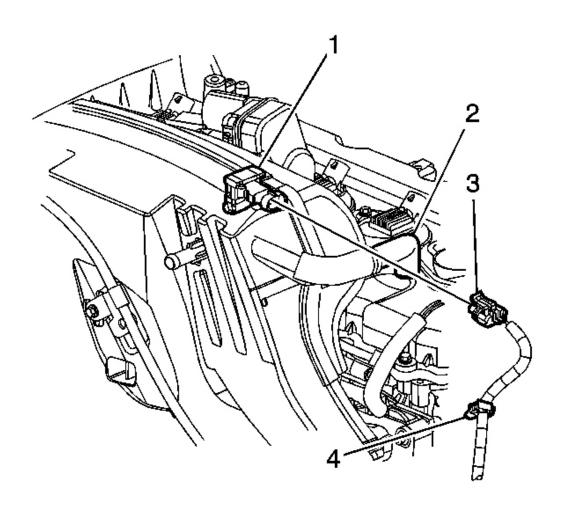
Identifying Intake Manifold & Attachments Courtesy of GENERAL MOTORS CORP.
